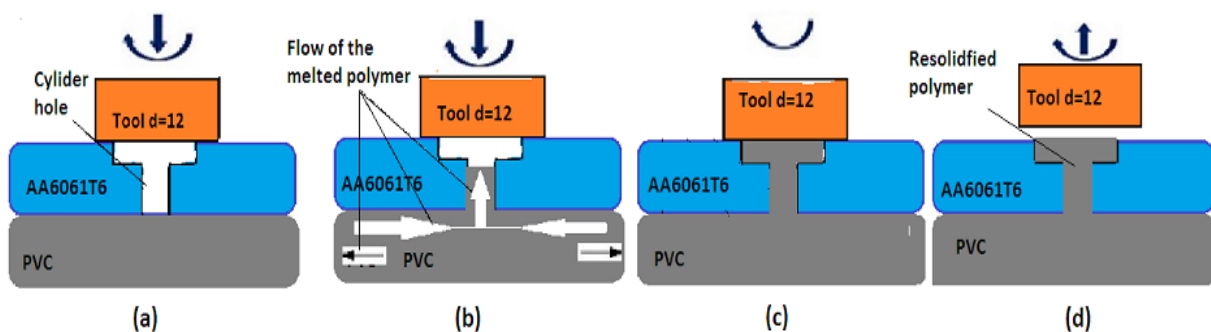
Graphical illustration of the steps for the joining process: a) Frictional heating and axial pressure, b) In-filling of the cylinder hole by the molten polymer, c) Filled hole by molten polymer and d) Tool retraction.
